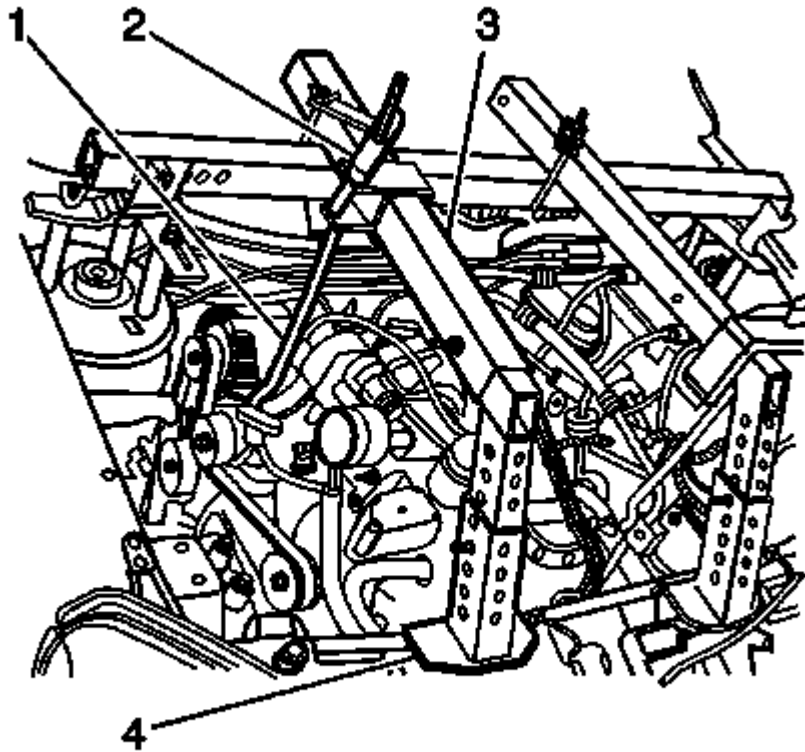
View Of J 28467-7A Lift Hook, J 28467-34 Wing Nut, Engine Support Fixture Cross Bar & J 36462-A Leg Assembly
